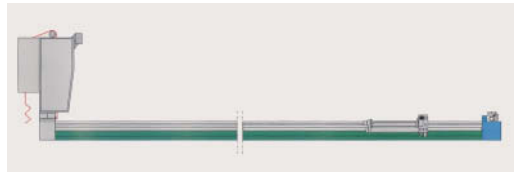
Side view of a modern table printing device with glueing device, conveyor belt for transportation of the printed fabrics and drying chamber.
